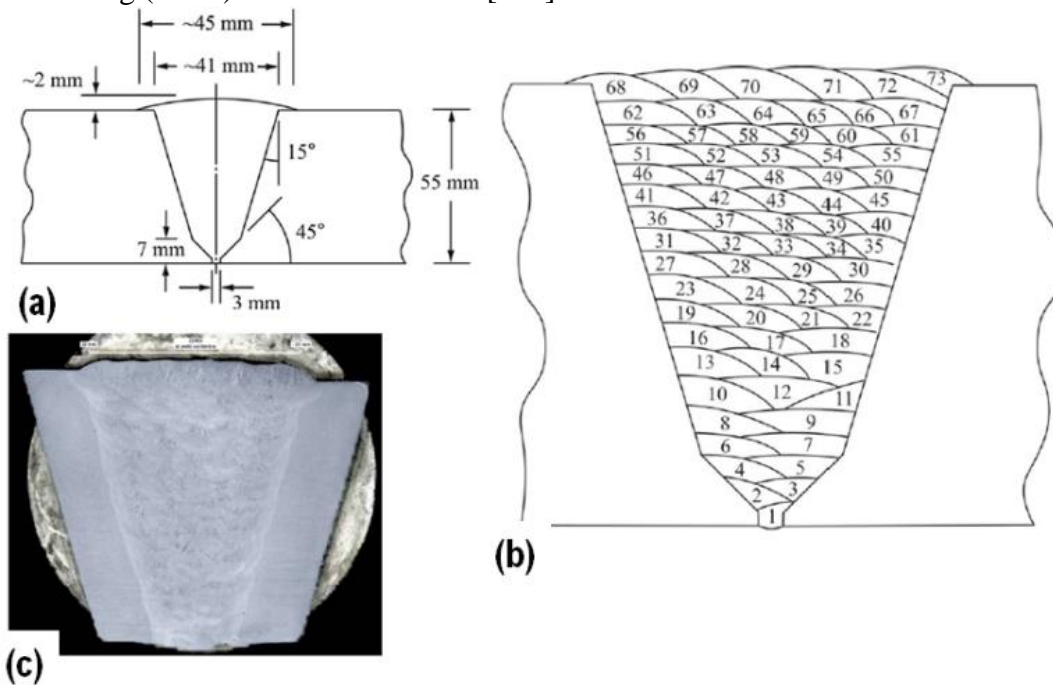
Single V girth weld configuration - (a) weld geometry (b) weld pass sequence and (c) macrograph of the weld cross section [133].
